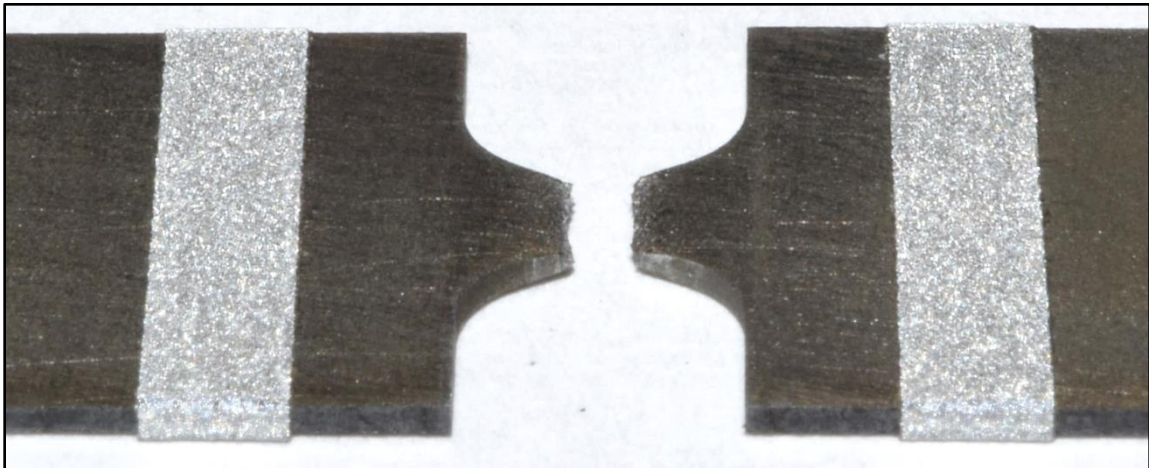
Small Notched Flat Specimen: Macro View of Typical Failure Zone
